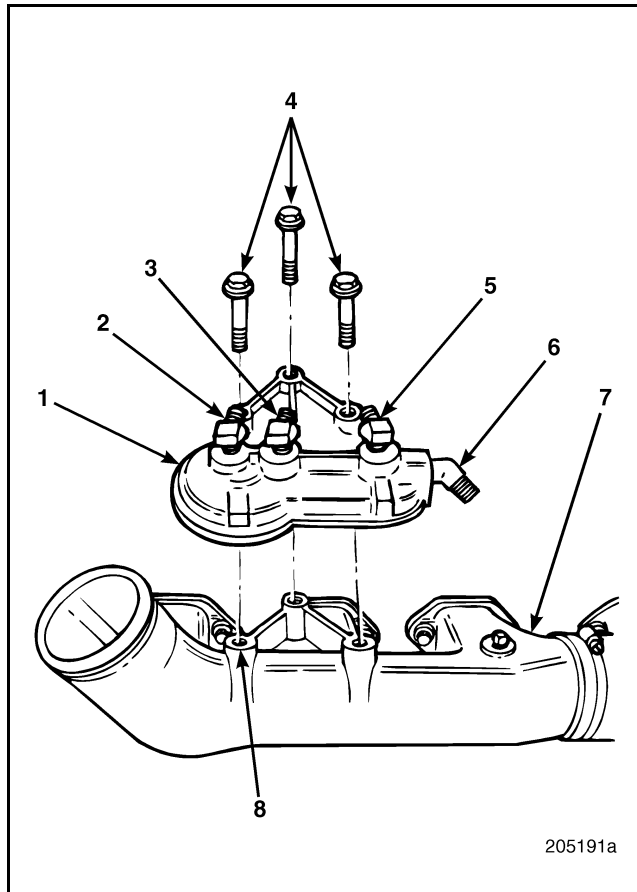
Fuel Filter Adapter Assembly Installation with Two-Piece Air Inlet Manifold
